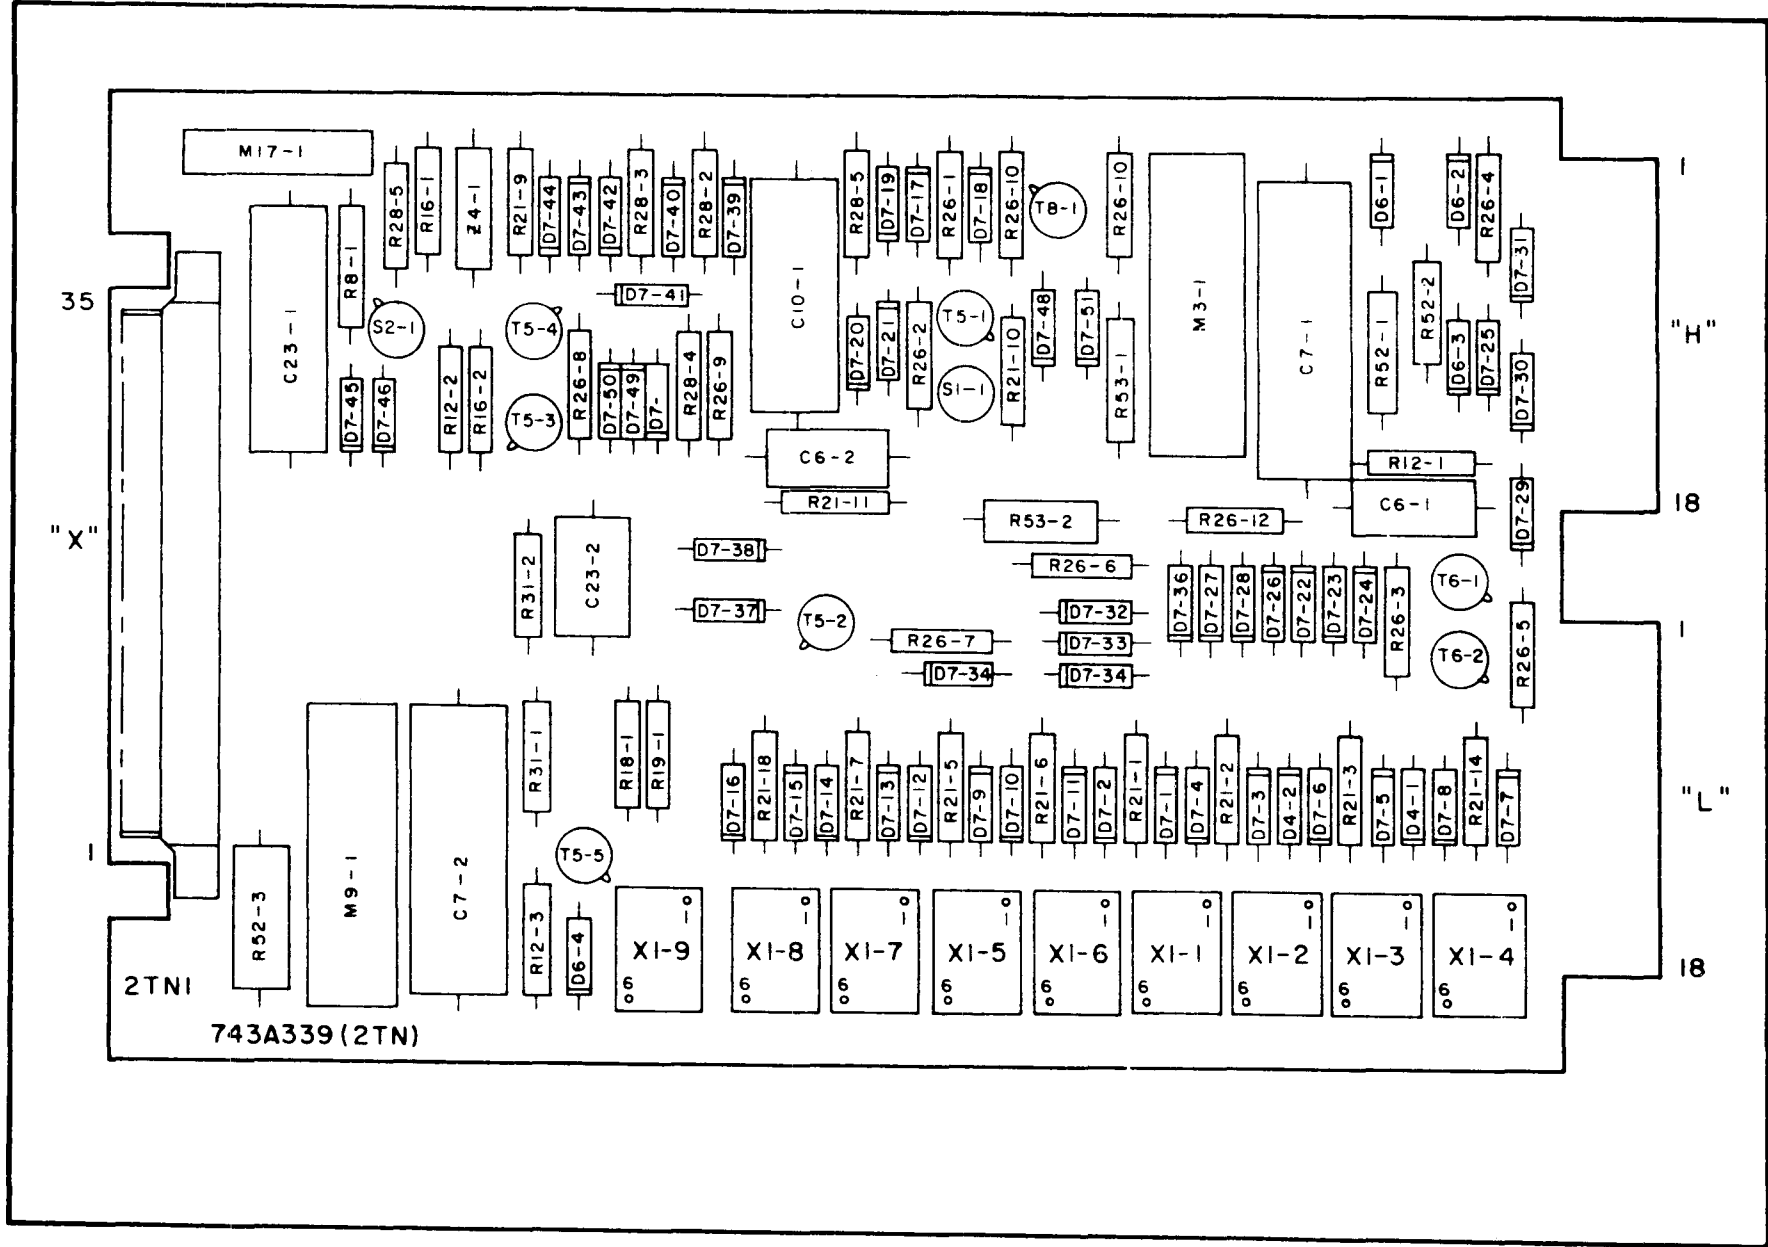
2TN1 ASSEMBLY (REF. DWG. 743A339, SUB 16)
